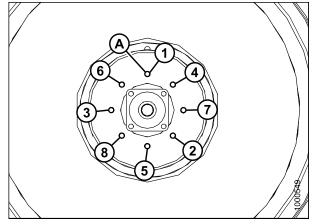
Forked Caster Wheel Nut Tightening Sequence
